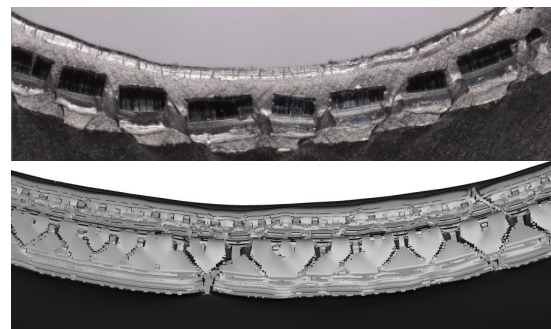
Fracture pattern of experimental- and numerical HET using 5.3% cutting clearance.
